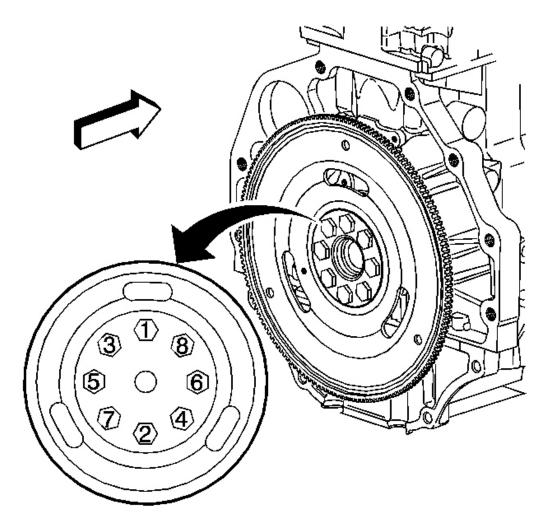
Tightening Sequence For Flywheel Bolts Courtesy of GENERAL MOTORS CORP.
